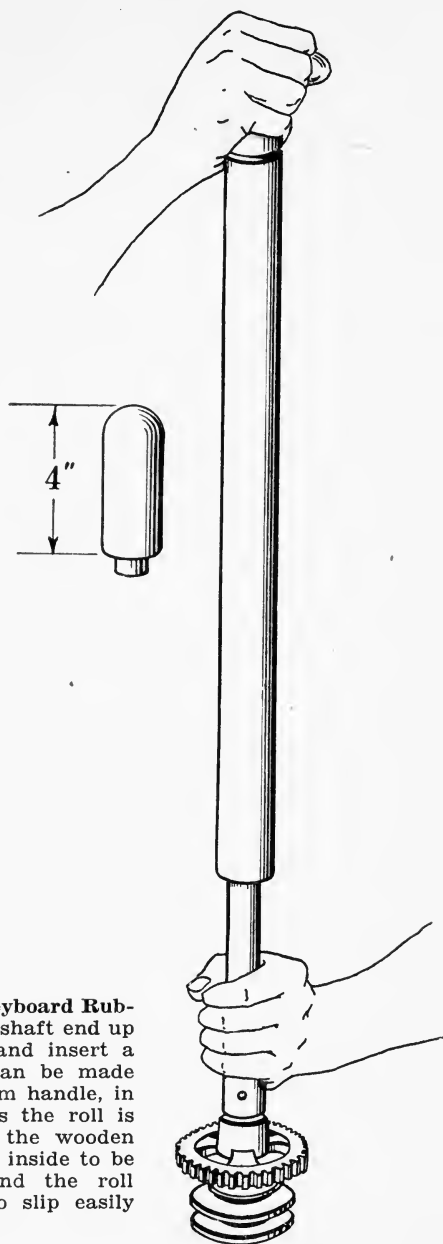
To Apply a Keyboard Rubber Roll, stand the roll shaft end up on a table or bench and insert a wooden plug, which can be made from a section of broom handle, in the top of the roll. As the roll is pushed on the shaft, the wooden plug will cause the air inside to be compressed and expand the roll which will cause it to slip easily upon the shaft.
